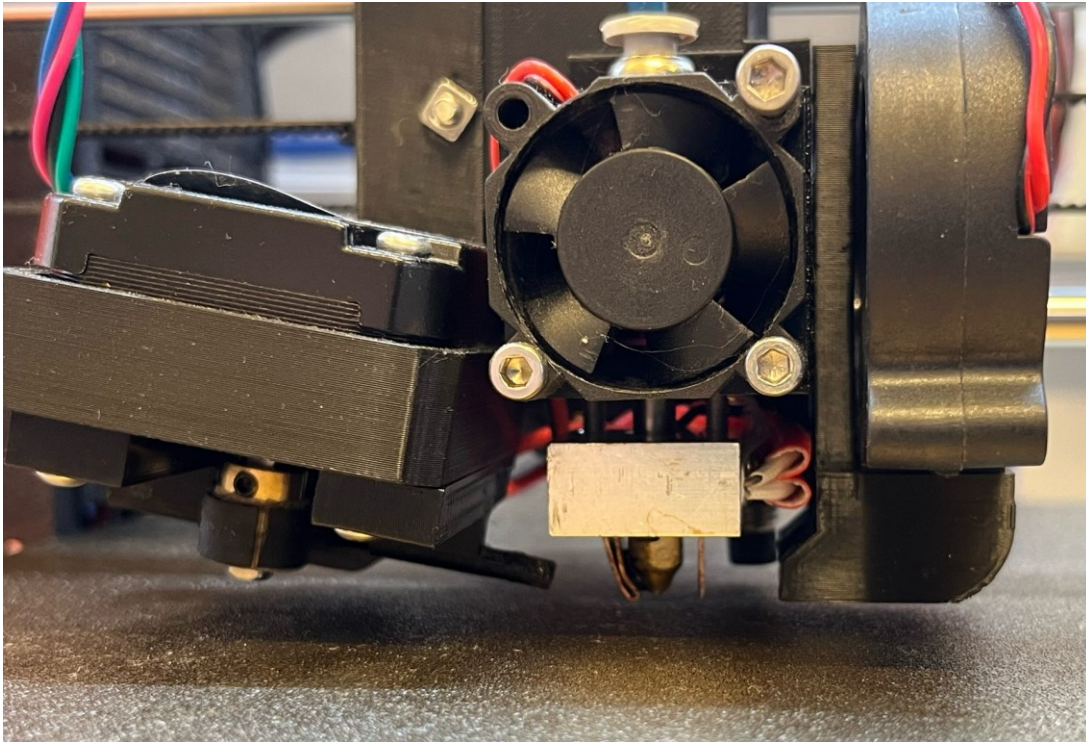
Image of the new extruder setup for CPCF 3D printing
